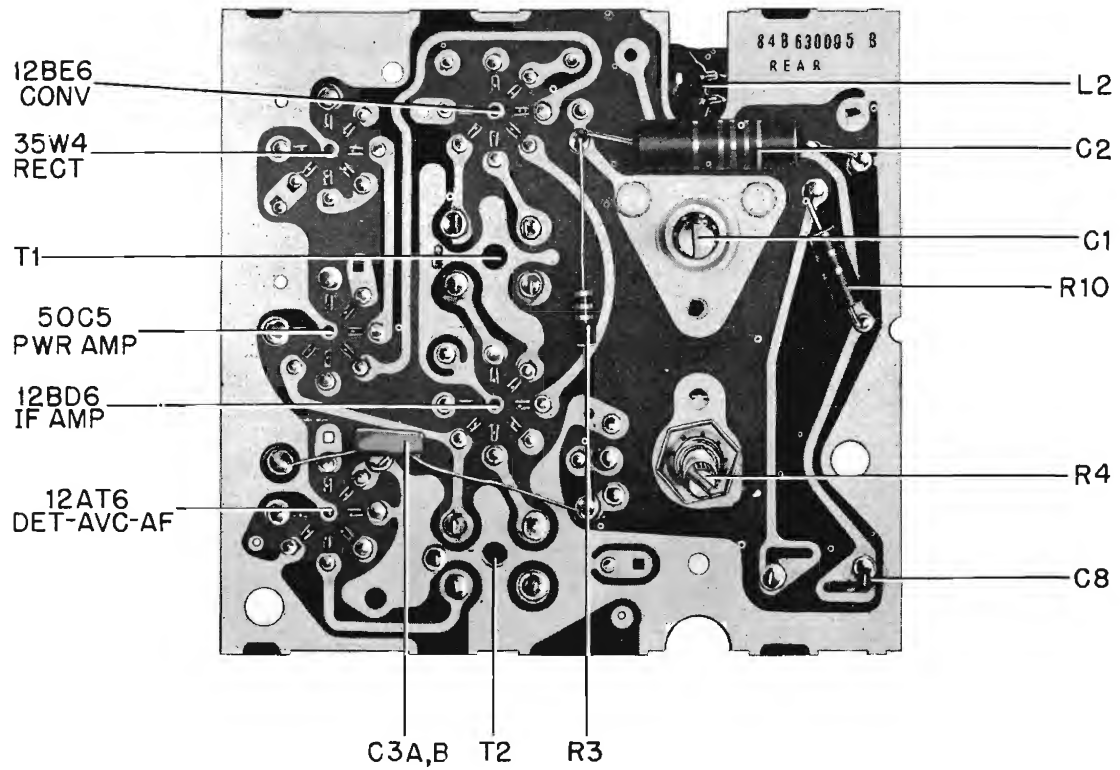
REAR VIEW OF CHASSIS-WIRED AND BLANK
